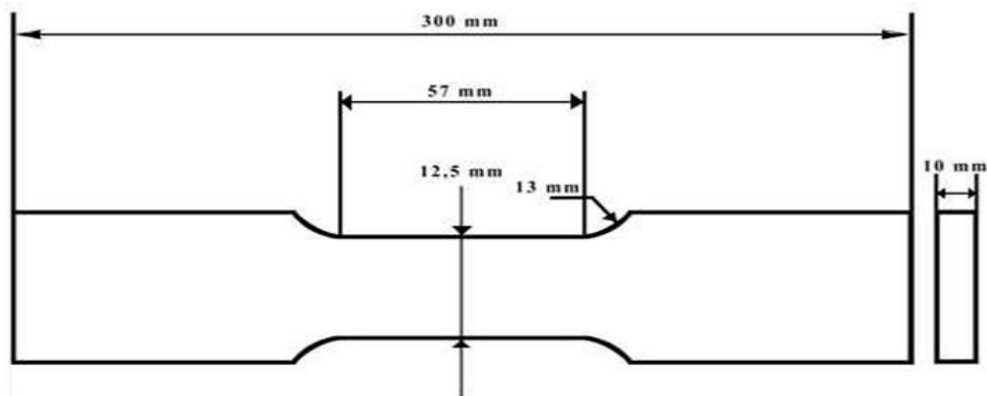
Shape and Dimensions of Test Specimens According to ASTM E8-M
